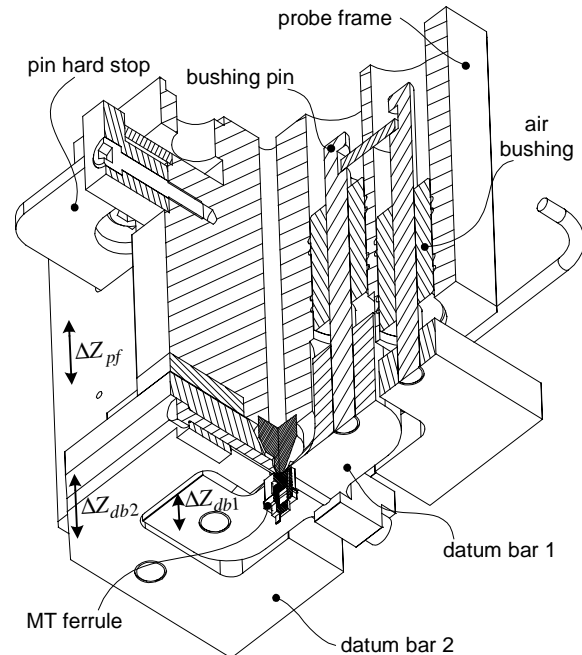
Probe Frame, Datum Bars, & MT Ferrule
